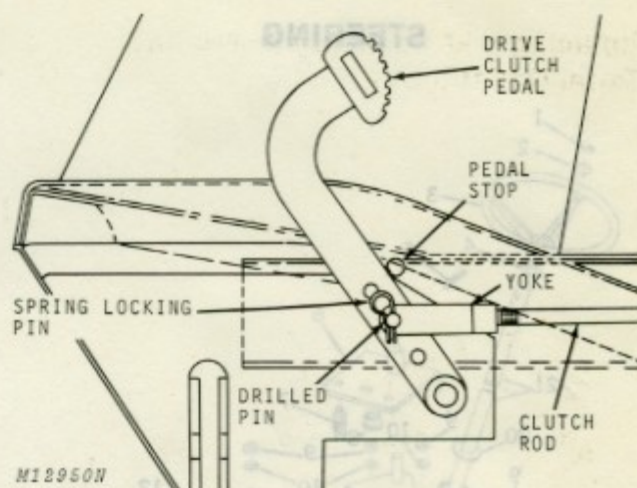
Adjusting Clutch Pedal (Serial No. 1001-10,000)
